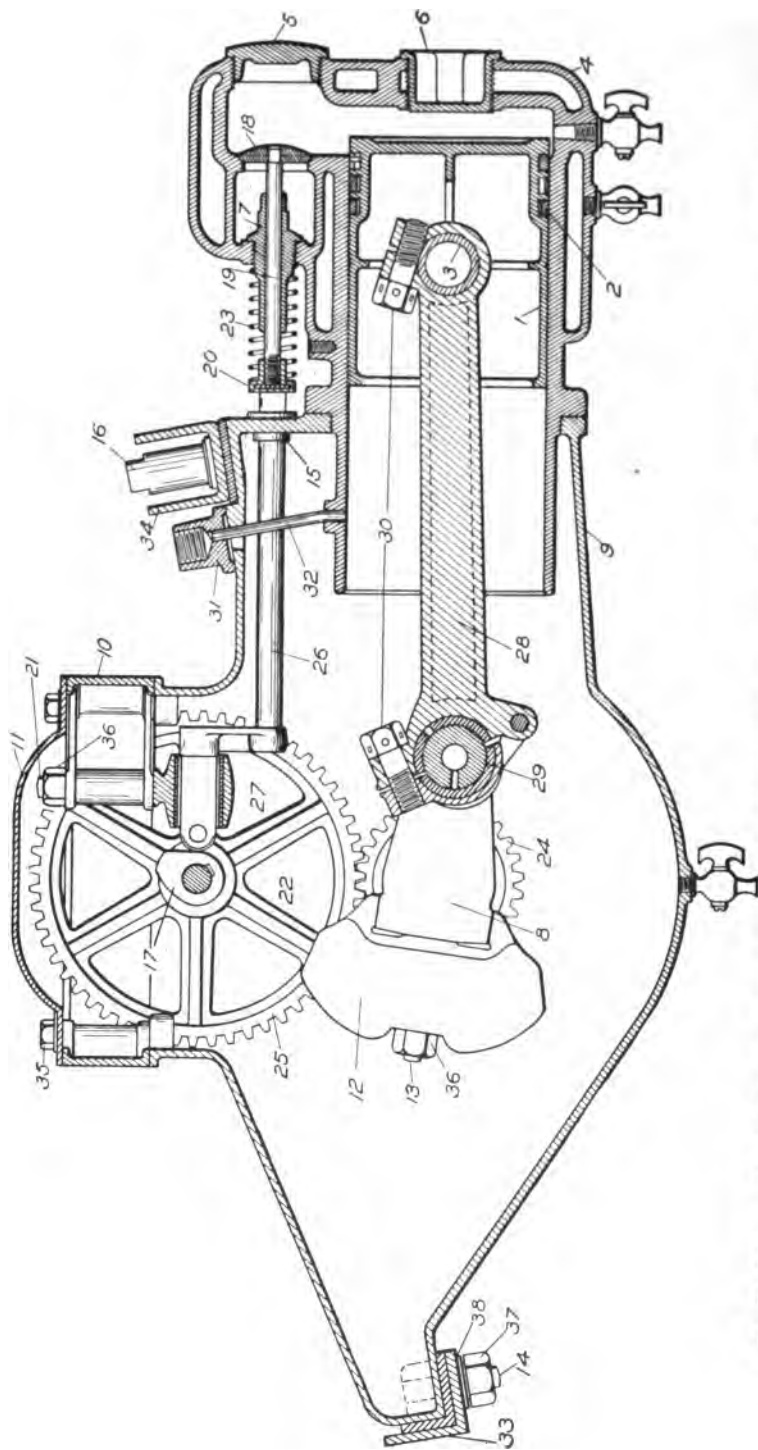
Diagram Showing Detailed Parts of Single-Cylinder Engine as Used in the Reo Car. Reo Motor Car Company, Lansing, Mich.
